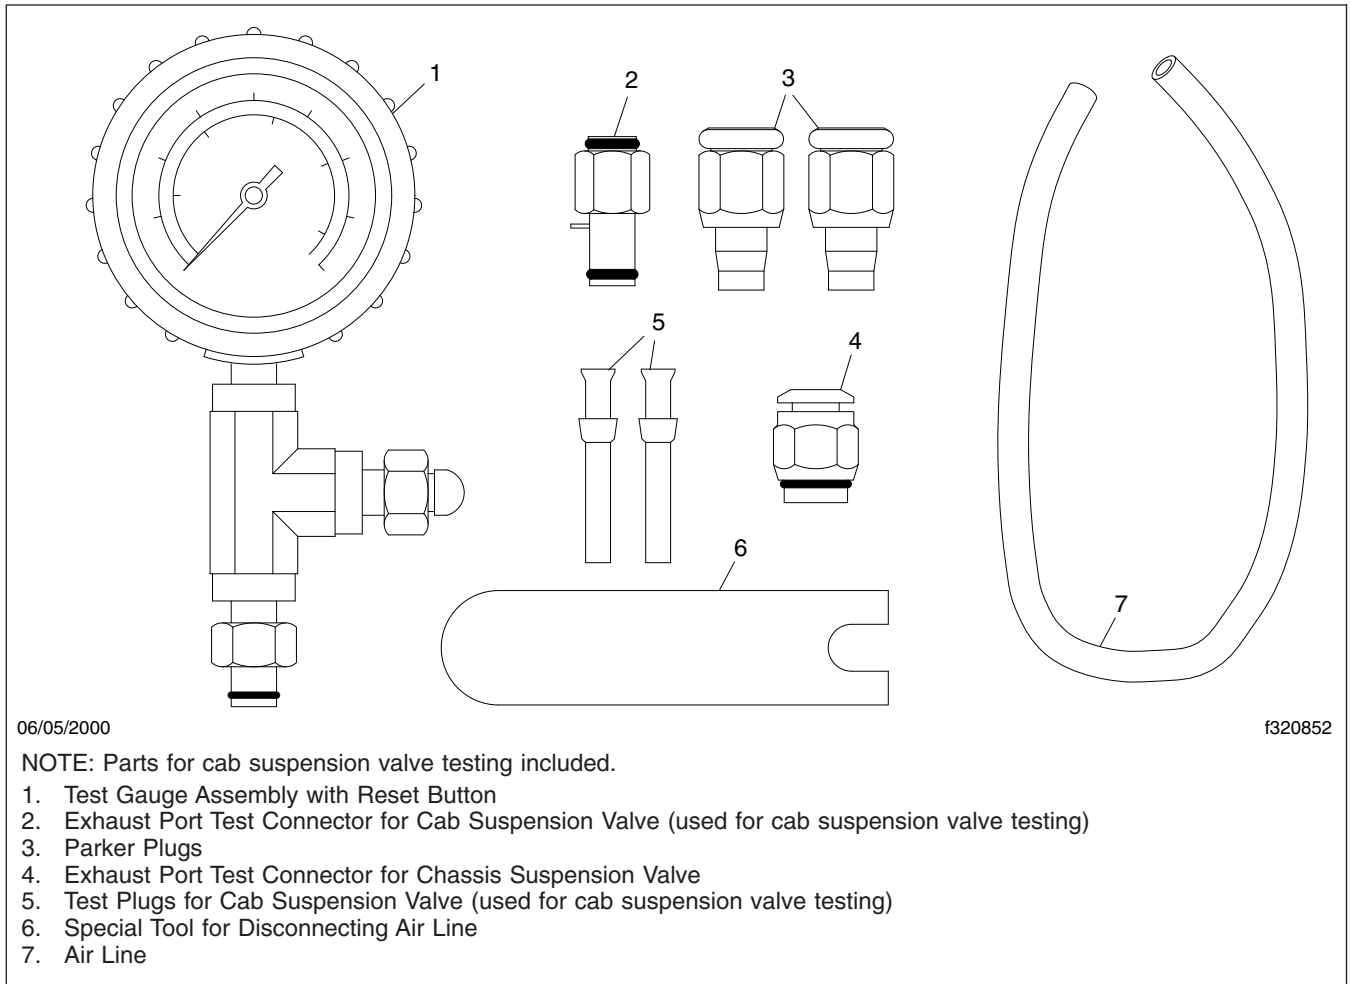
, Barksdale Height-Control Valve Test Kit BKS KD2264
